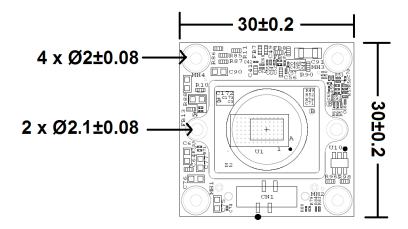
Front View of e-CAM24\_CUNX Module Board Mechanical Dimensions
